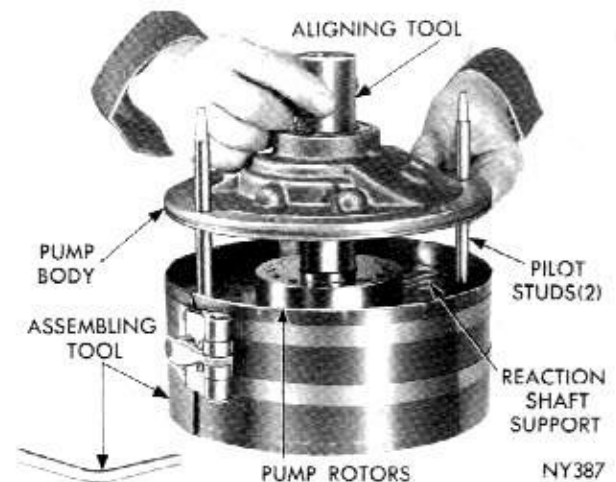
Assembling Pump and Reaction Shaft Support (A-904)
